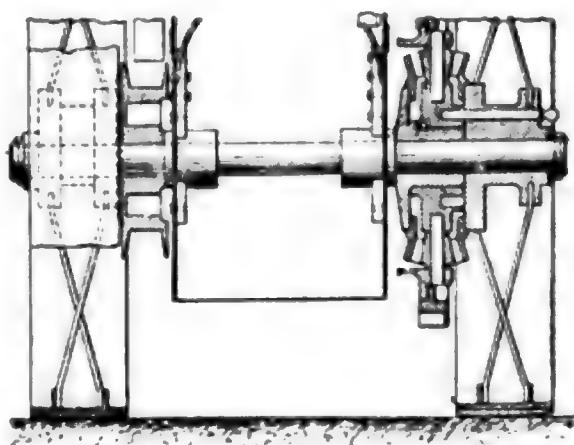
COMPENSATING GEAR AND BRAKE DRUM.
